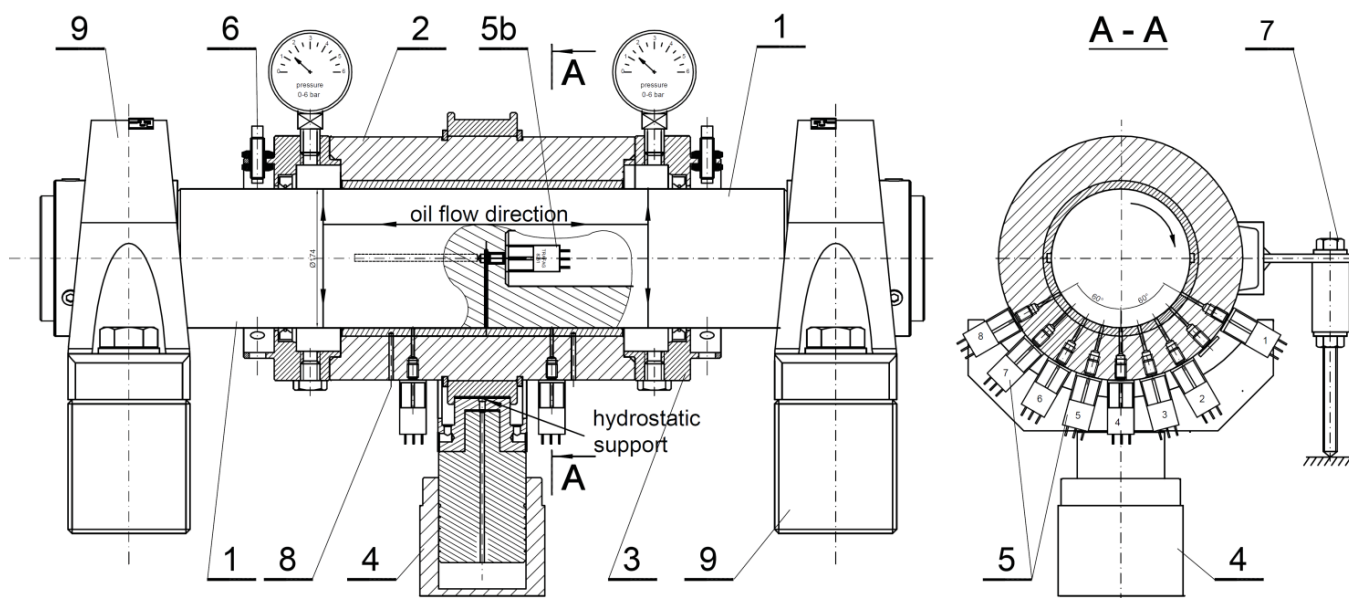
Single bearing test stand (SBTS) developed in Gdansk University of Technology; 1- main shaft, 2- tested bushing unit, 3- covers with seals, 4 - load exertion system – hydraulic jack, 5- pressure sensors, 5b- pressure sensor in the shaft, 6- distance sensors, 7- friction force sensor, 8 - temperature sensors installed in the bushing sliding layer; 9 - supporting shaft roller bearings
